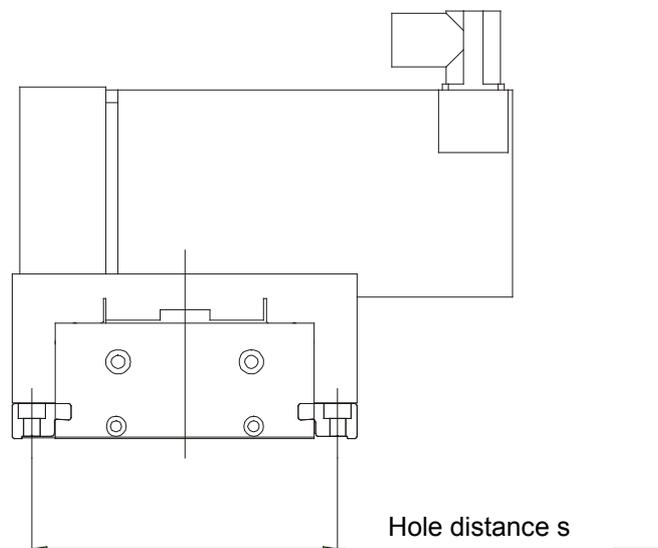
Attachment of the linear modules with clamping elements/clamping profile
